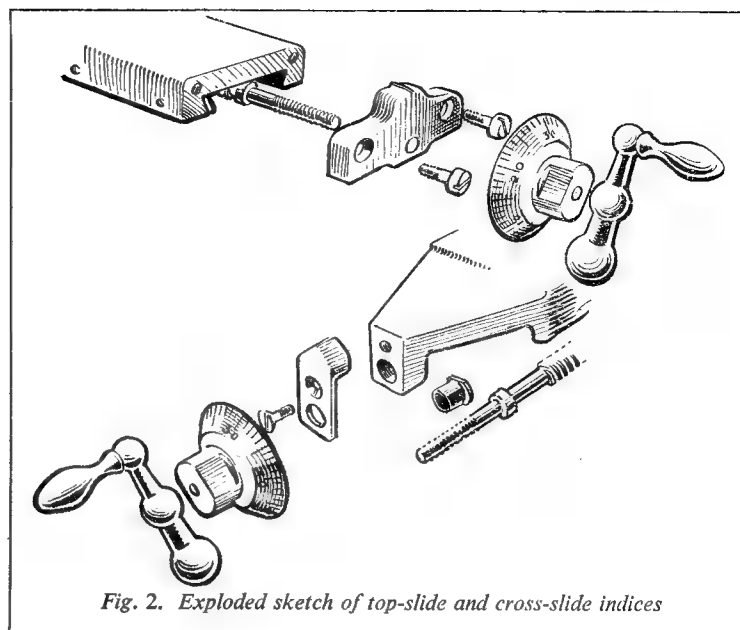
Exploded sketch of top-slide and cross-slide indices
